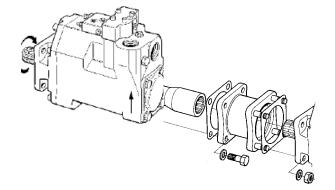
Adaptor kit (P/N 379 7795) for tandem coupling.
